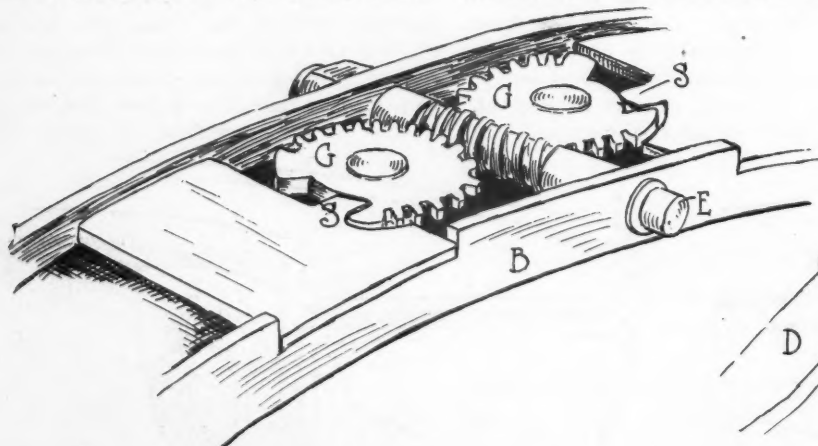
THE BOOTH DEMOUNTABLE HAS A WORM AND GEAR LOCK. E, WORM; G, GEAR; S, SHOULDER ON PLATE. BY TURNING THE WORM GEARS G ARE ROTATED AND PLATES MOVED OUT
